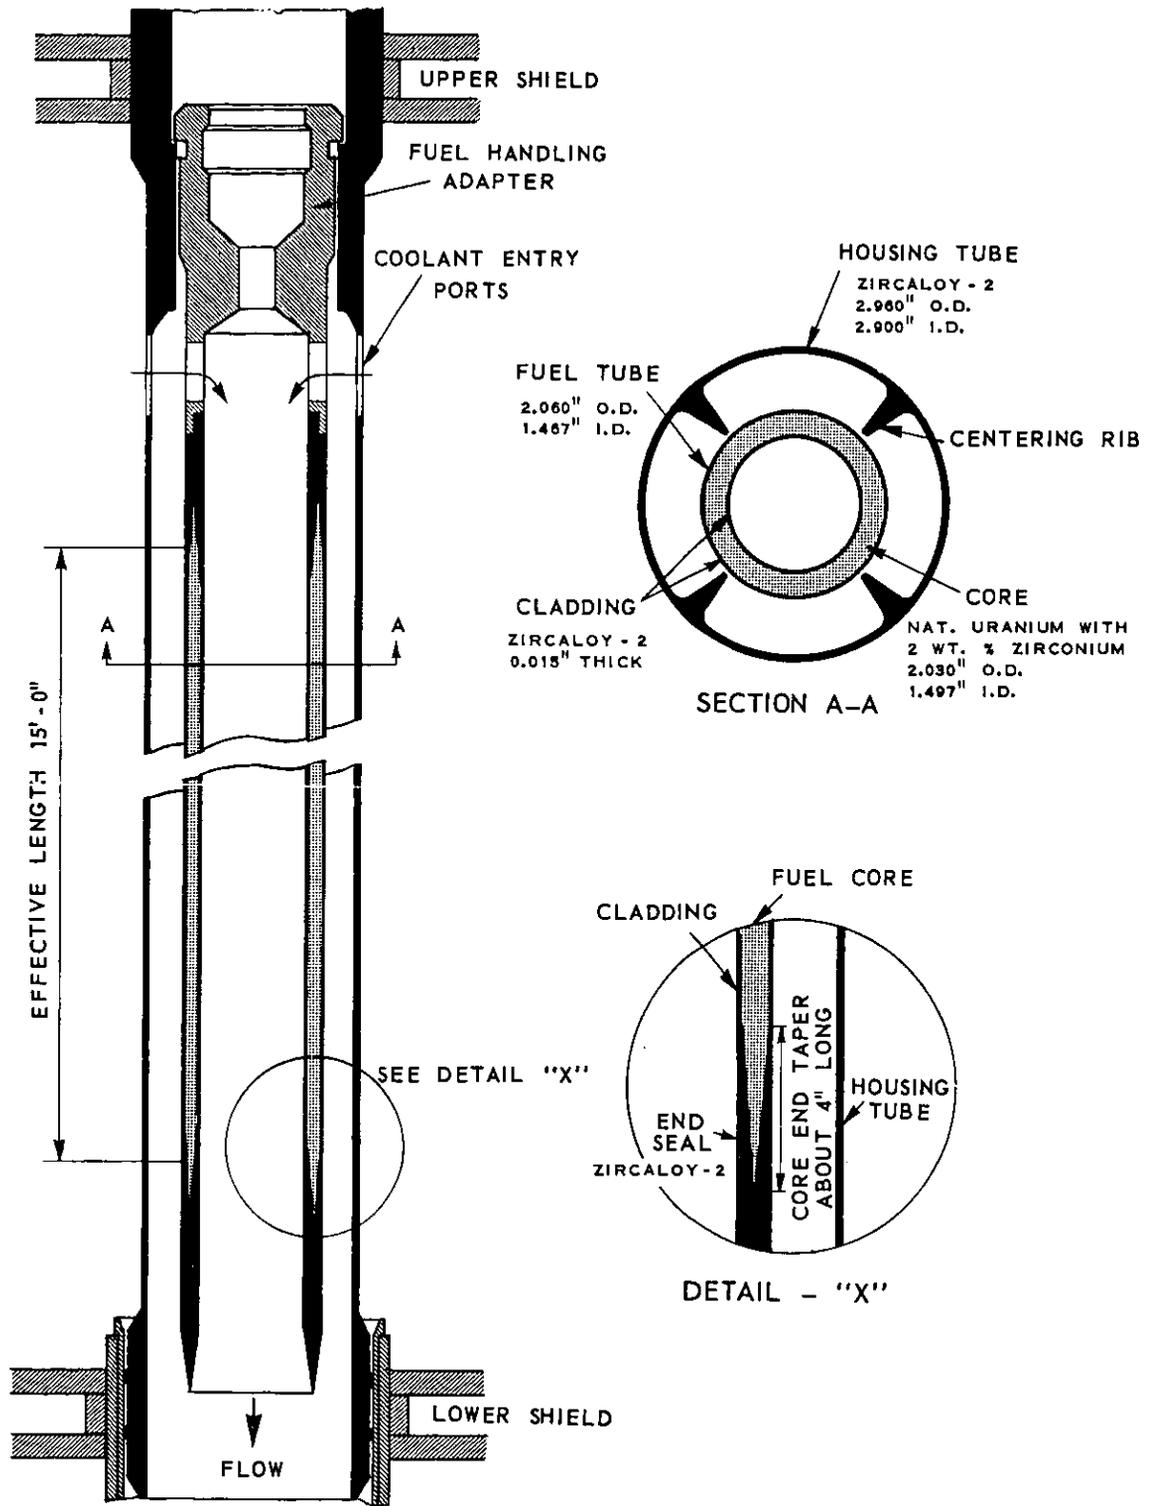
FUEL ELEMENT AND HOUSING TUBE SECTION
